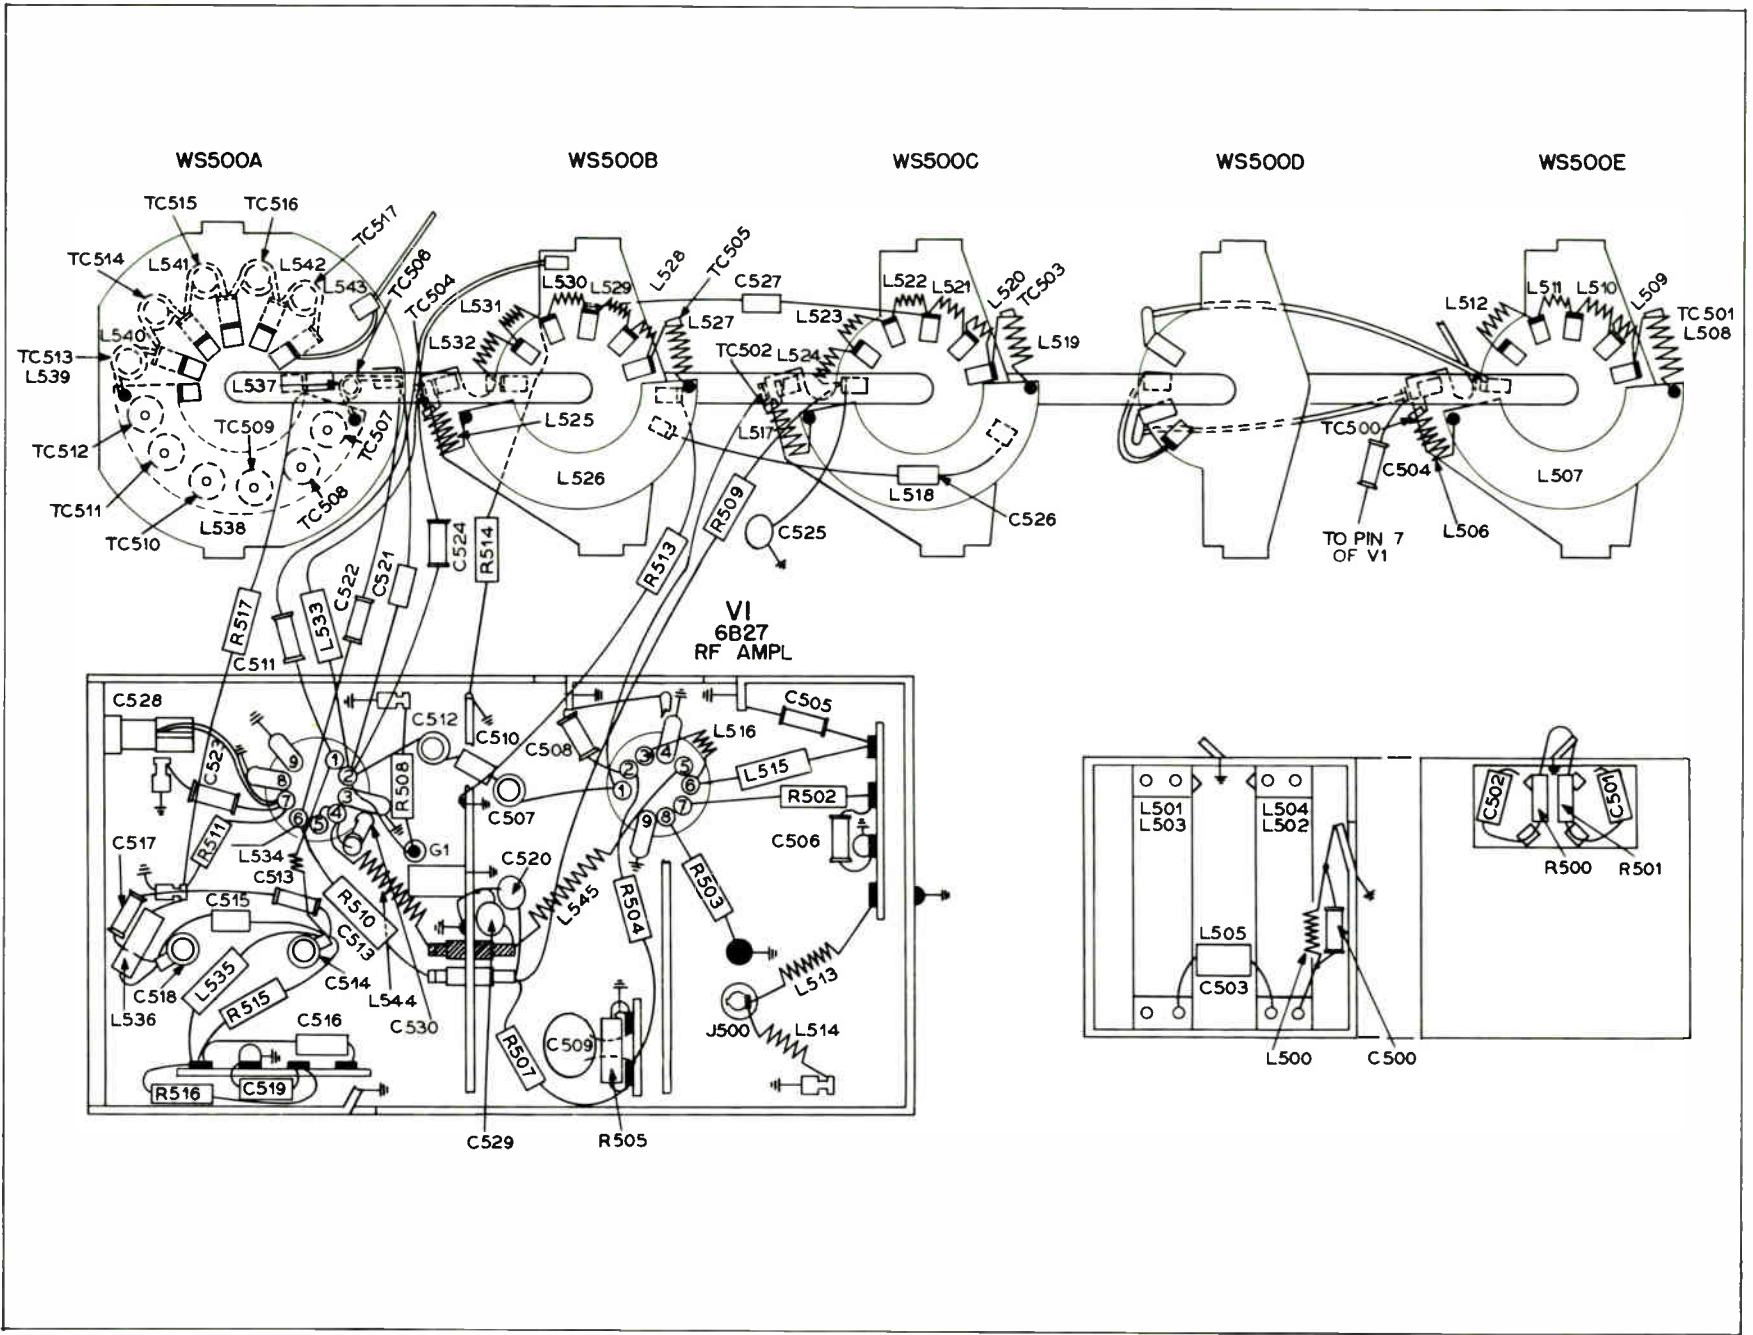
Television Tuner, Part No. 76-7600, Base Layout
